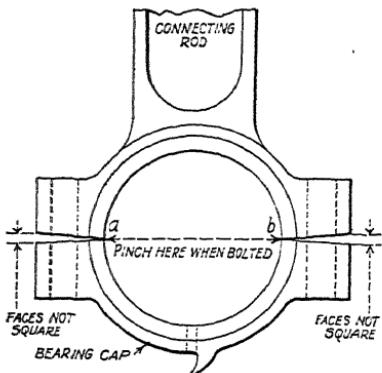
Faces of Connecting Rod and Cap Filed with Convex Surface.
